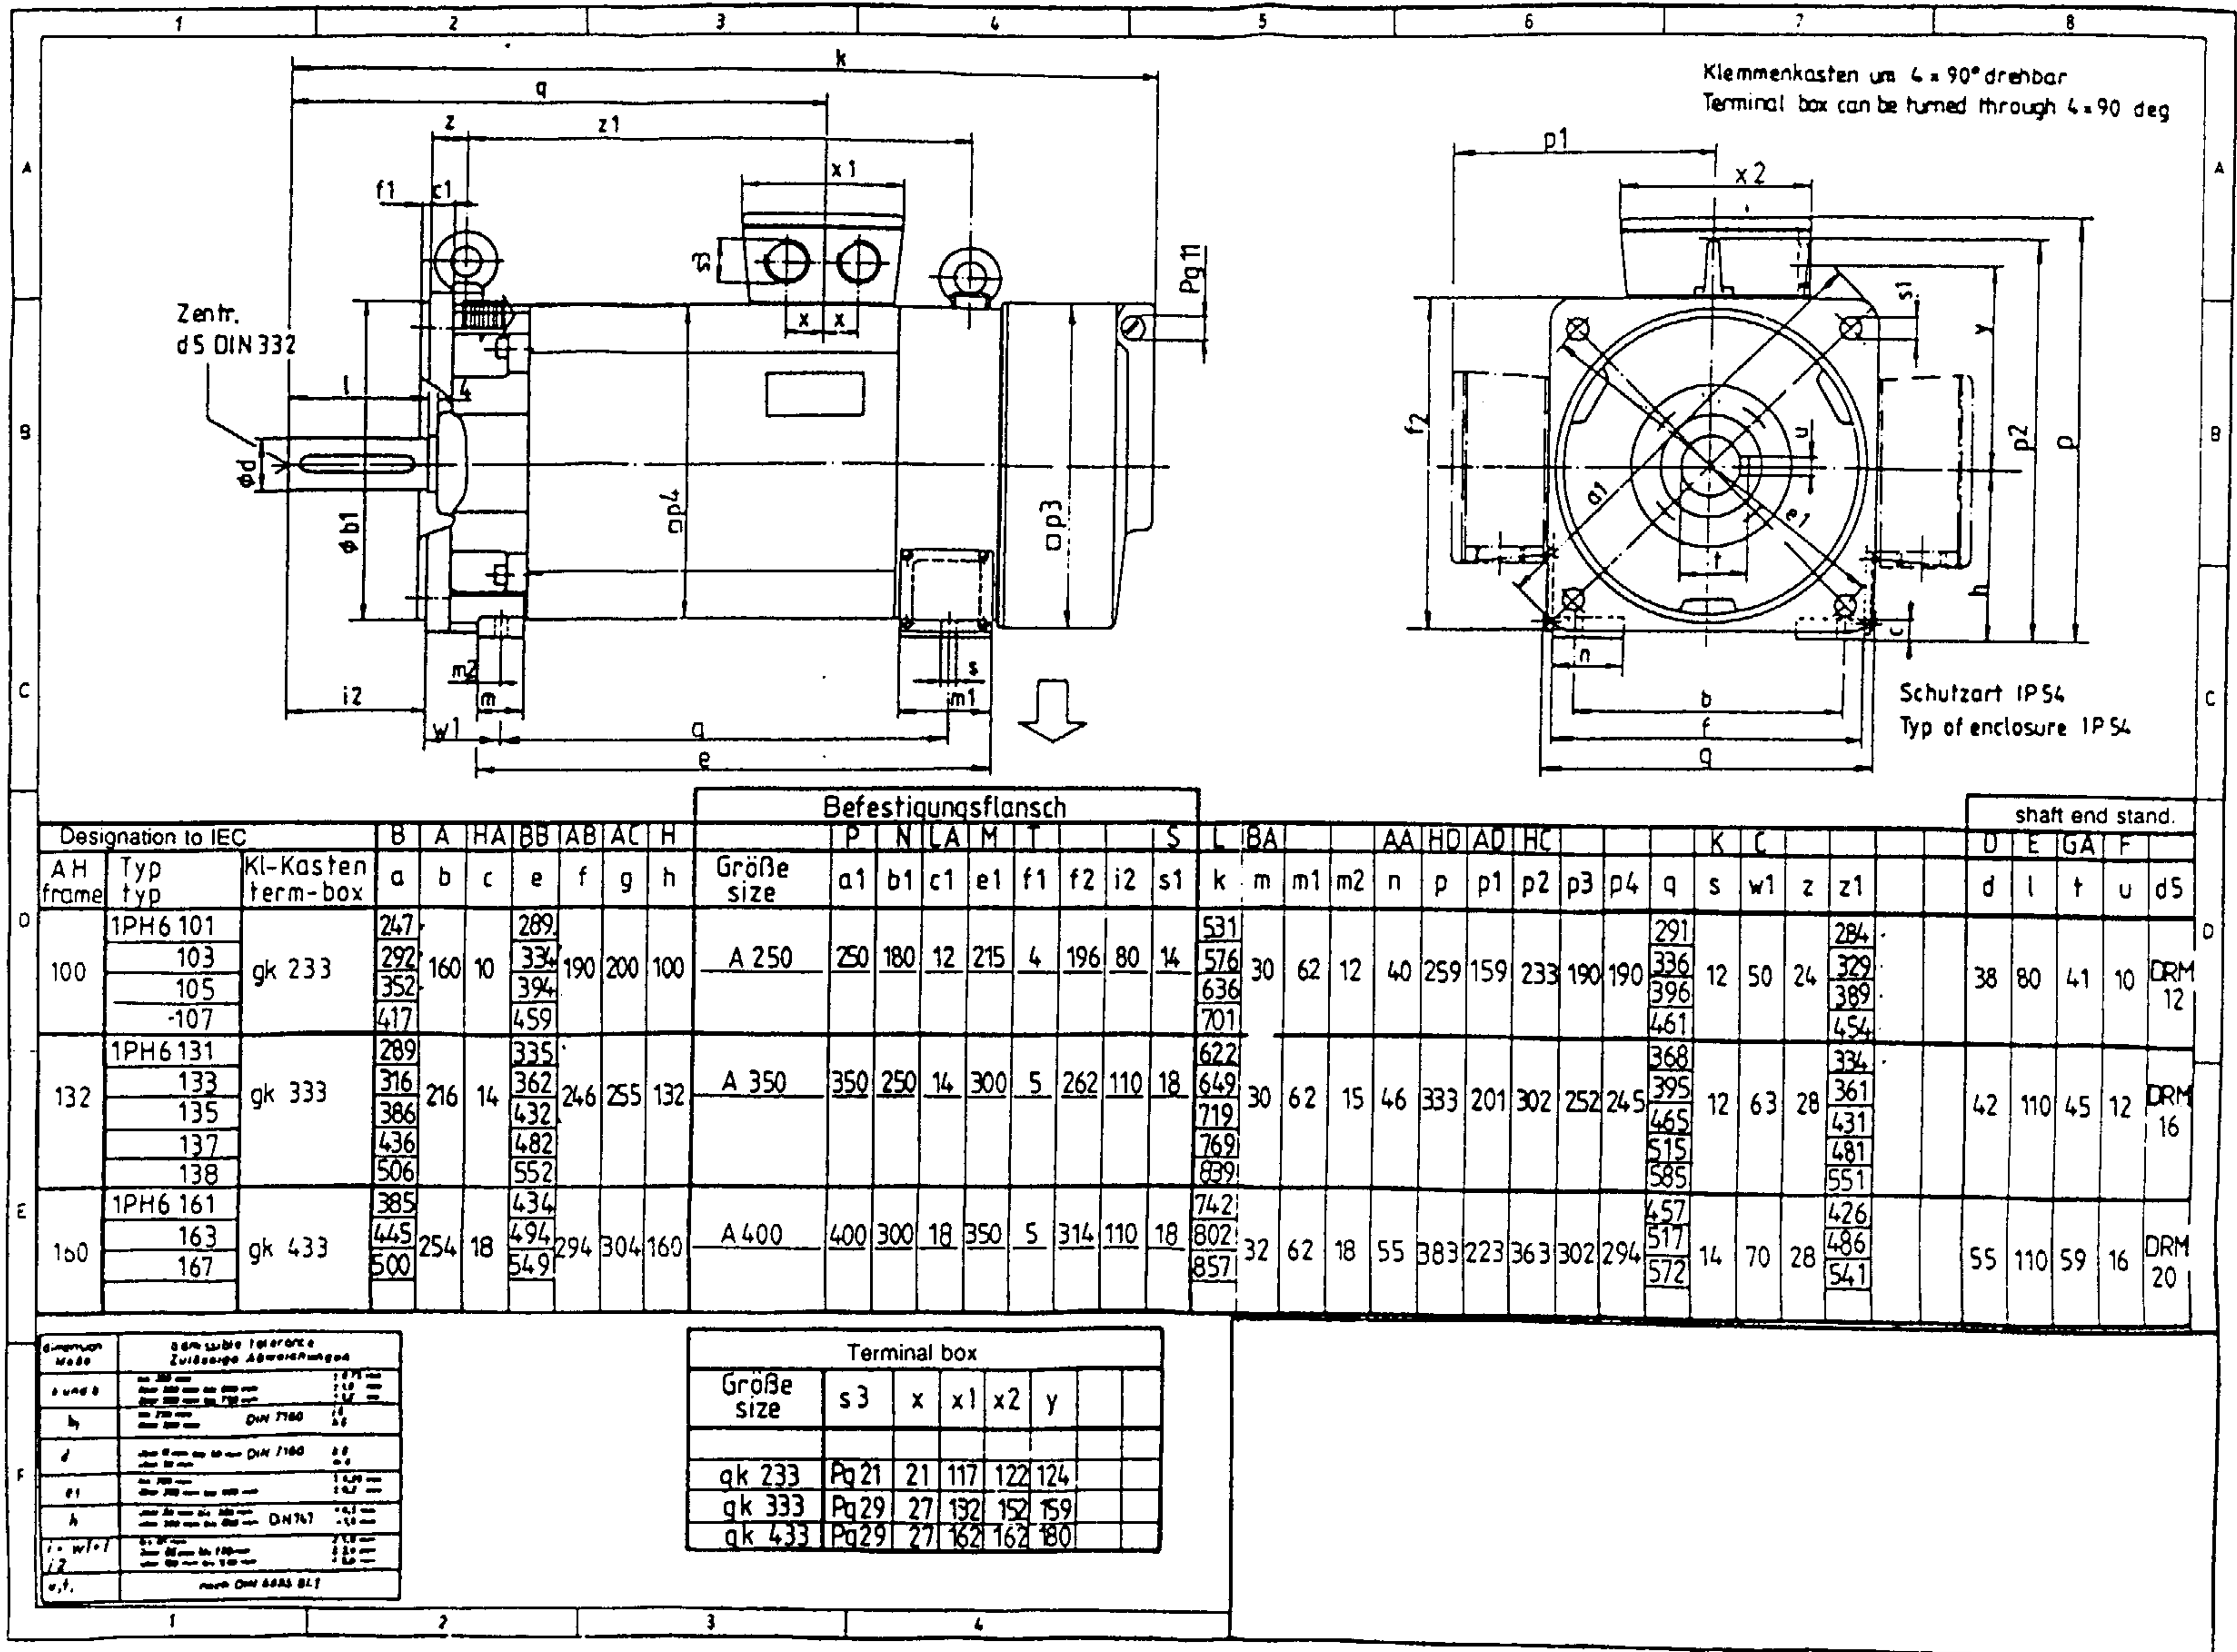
Dimension sheet for 1PH6 101 to 167, AC motors, type of construction IM B3
